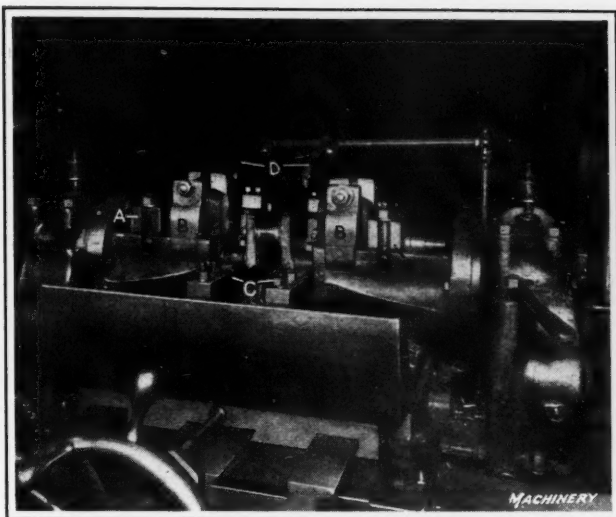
Lathe equipped with Two Tools for simultaneously turning Two Crankpins on the Essex Crankshafts
